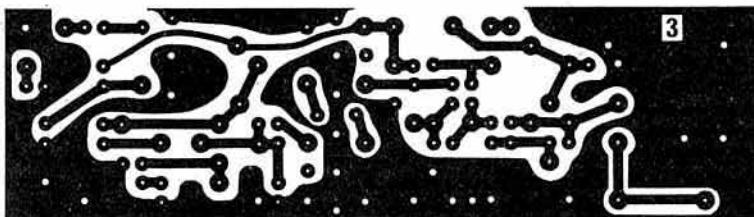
Etching pattern for the standard vfo converter board (PCB3)
